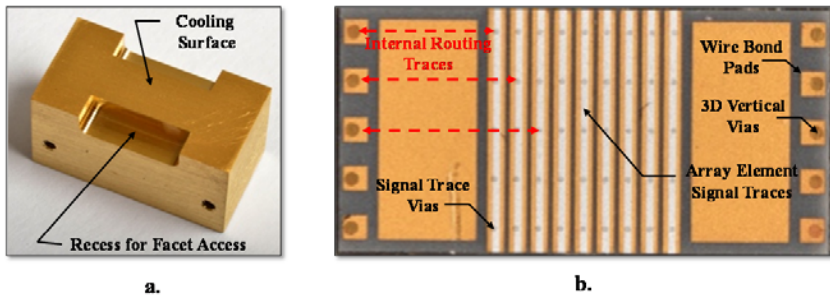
(a) High performance micro-impingement cooler. (b) AlN multilayer carrier.
